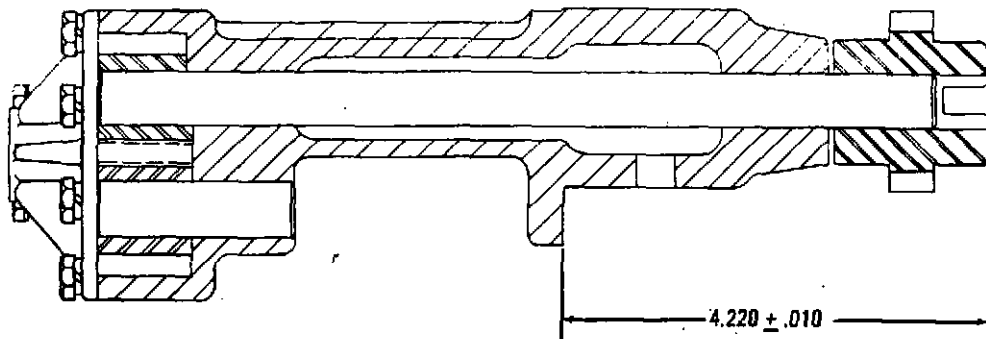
Oil Pump Drive Gear Installation Dimensions
